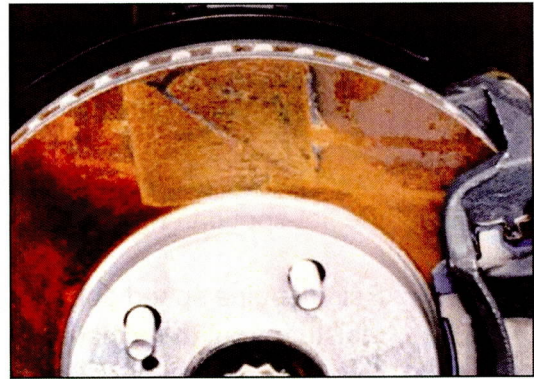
Slight Rust on Rotor (Easy to Remove by Braking)
